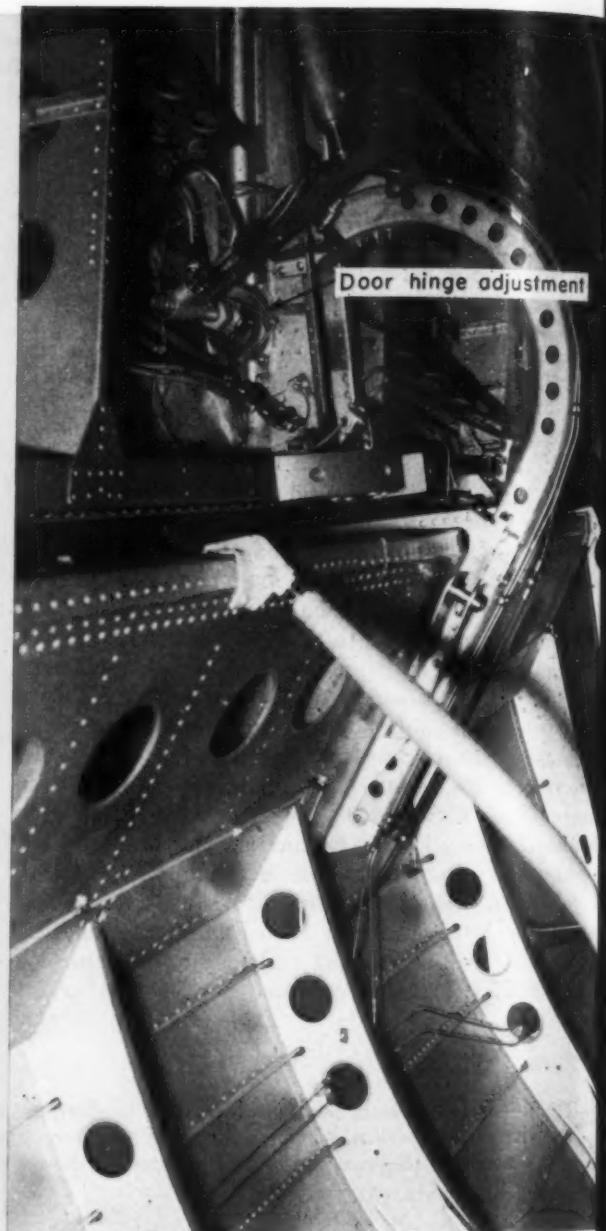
Right—Close-up of door hinge. Door disconnect mechanism, Fig. 10, is located where hinge is attached to door
